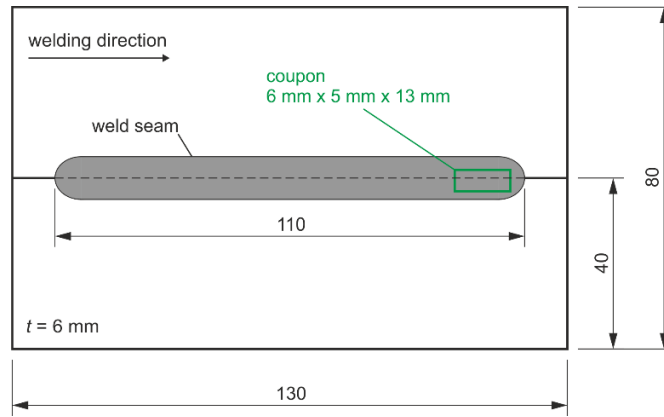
Weld geometry and position of separation of the coupon
